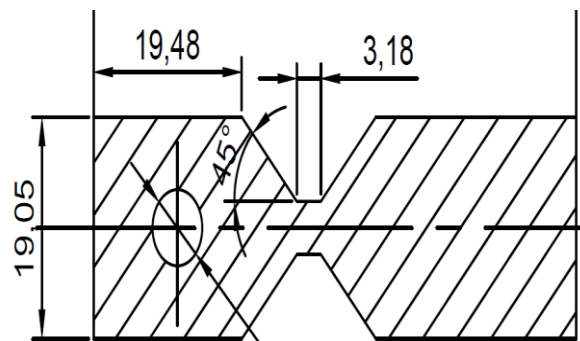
High cyclic fatigue sample drawing (Dimensions in mm).
